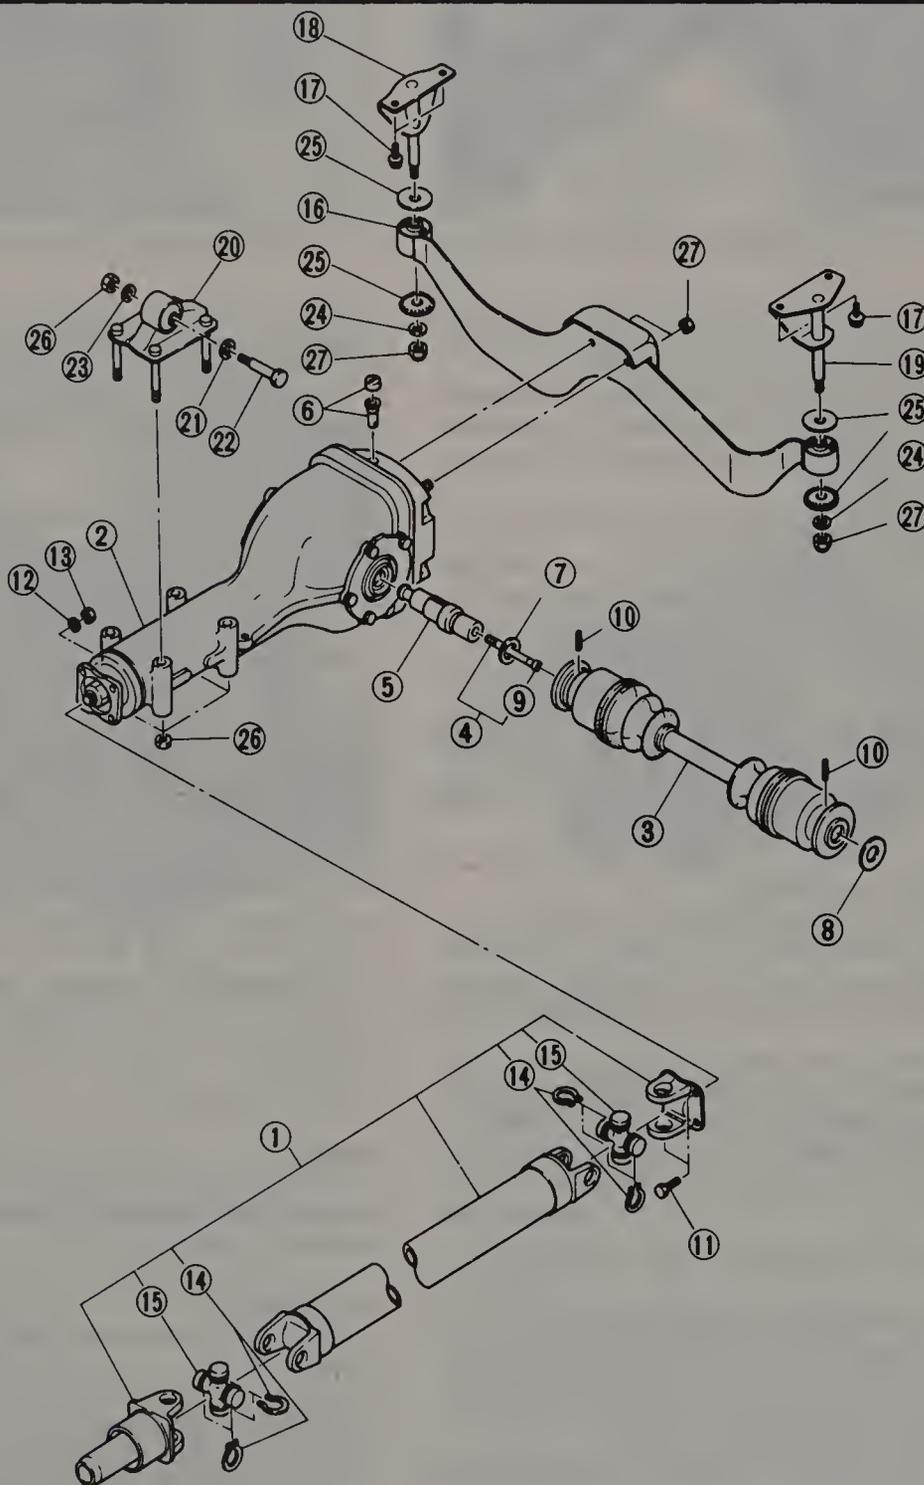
Rear drive components (4WD) – exploded view (Sec 5)
